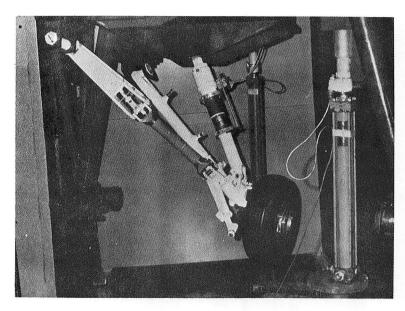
Landing gear assembly from boron/aluminum metallic matrix laminates.
